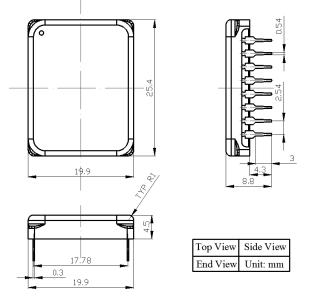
Dimensions of the DIP Package Controller of TECA1-5V5V-NT
